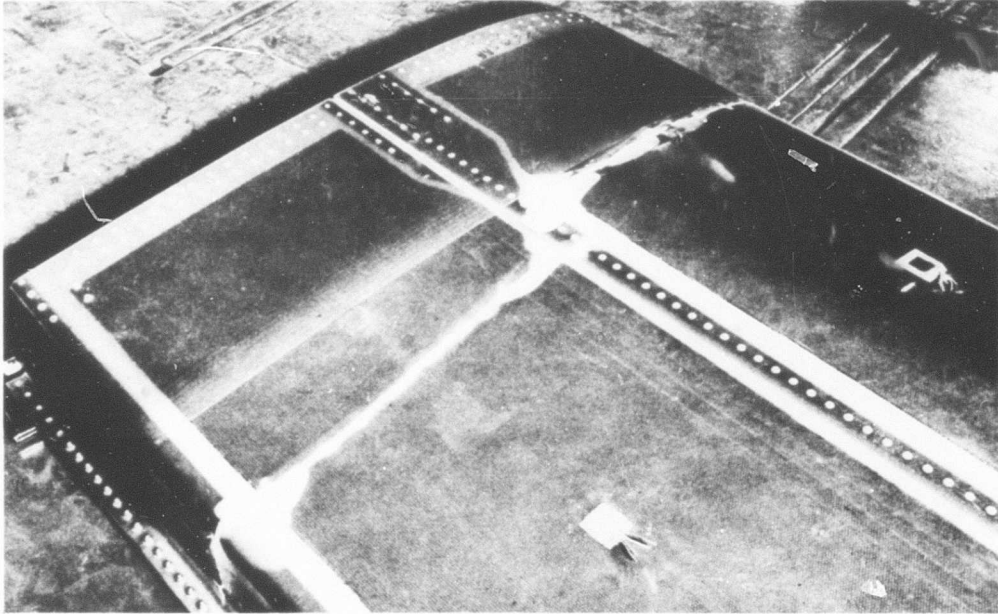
No. 1 FRP Wing Section - Failure of the Upper Surface Panels.
